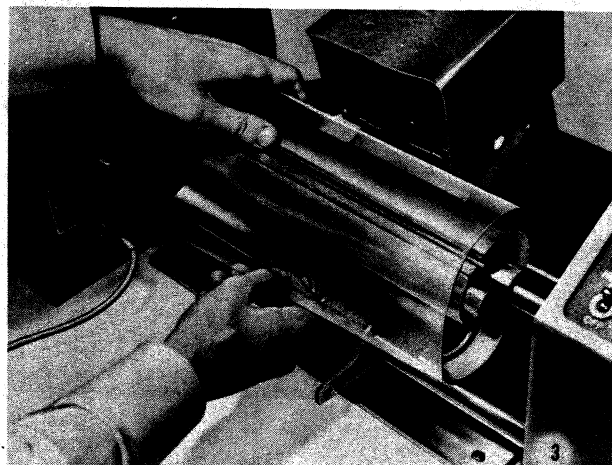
Mounting of Blank Plastic Plate for Engraving.
